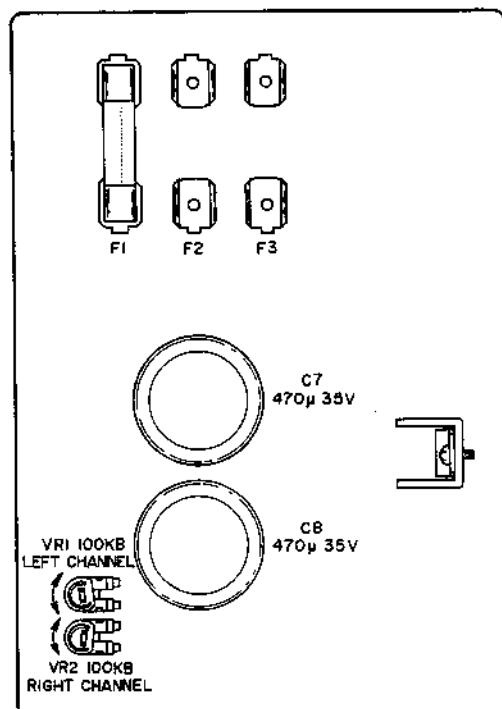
Power Sys. Con & OSC P.C Board (AC-3503) Adjustment
